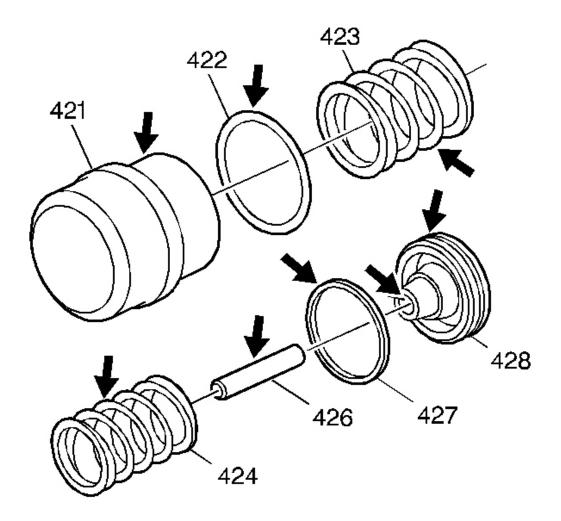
Identifying 3-4 accumulator piston Inspection Areas Courtesy of GENERAL MOTORS CORP.
